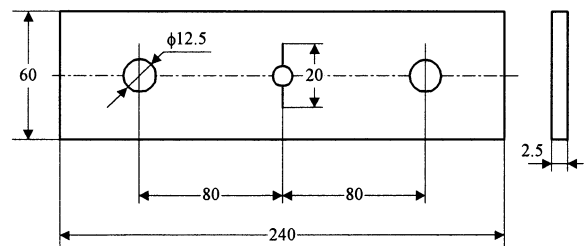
Specimen shape used for FCG tests (dimensions in mm).
